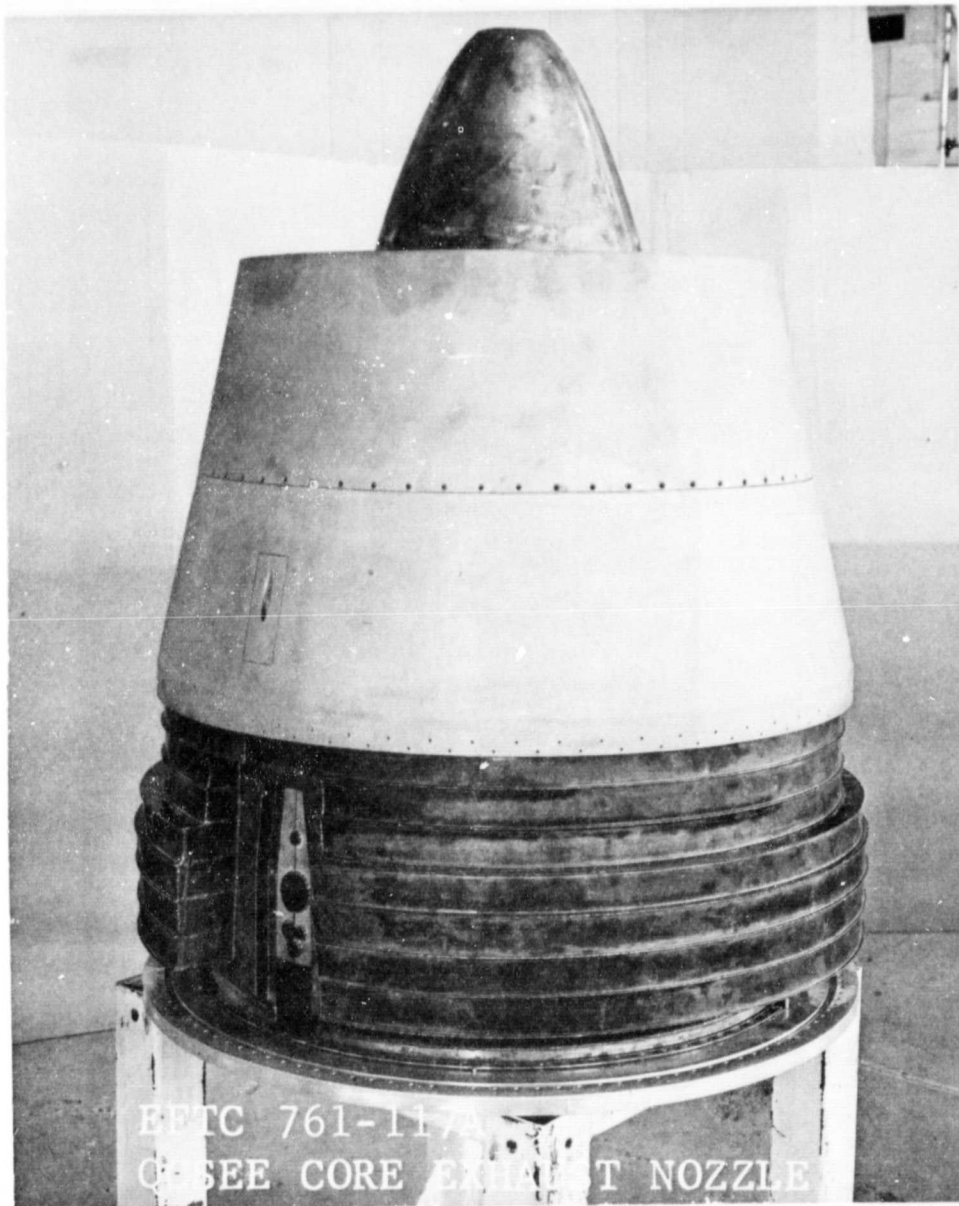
QCSEE Core Exhaust Nozzle Assembly.
